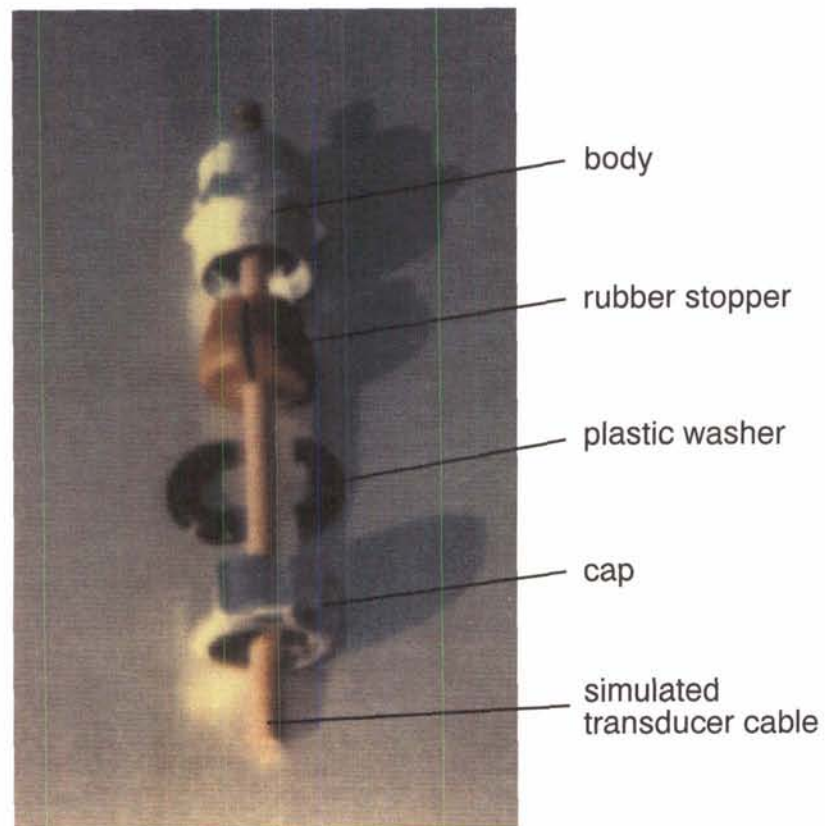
Exploded view of the 3/4-inch cable tension relief fitting (CGB fitting) parts. The 1/4 inch diameter transducer cable is simulated by the 1/4 inch diameter eraser. This long eraser (used in electric erasers) was also used in cable tension relief fitting pressure tests and pressure tests of the complete well head assembly.
